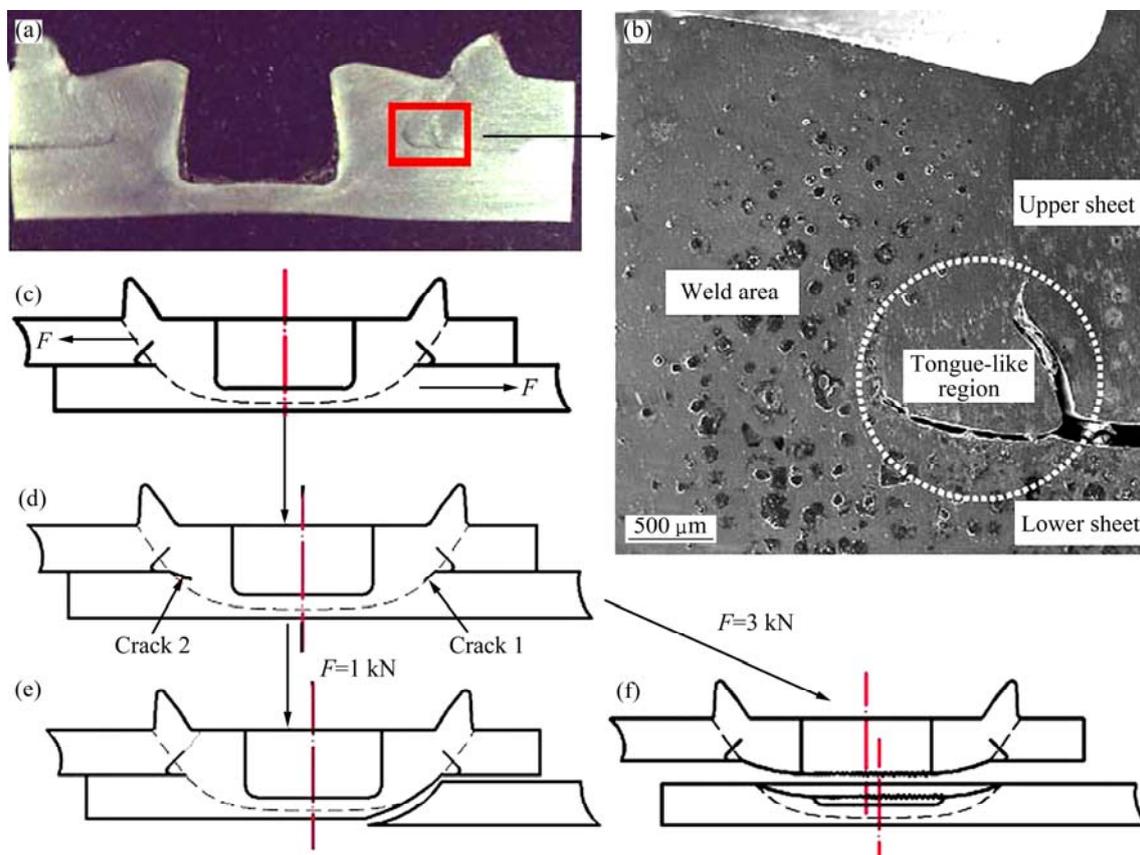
Fatigue failure mechanism of FSSW AZ31 alloy sheet joints: (a) Macro-photograph of transverse section through center of FSSW joint; (b) Microstructure of stirred zone; (c) Before fatigue test; (d) Primary stage of crack propagation; (e) failure mode when $F=1$ kN; (f) Failure mode when $F=3$ kN
